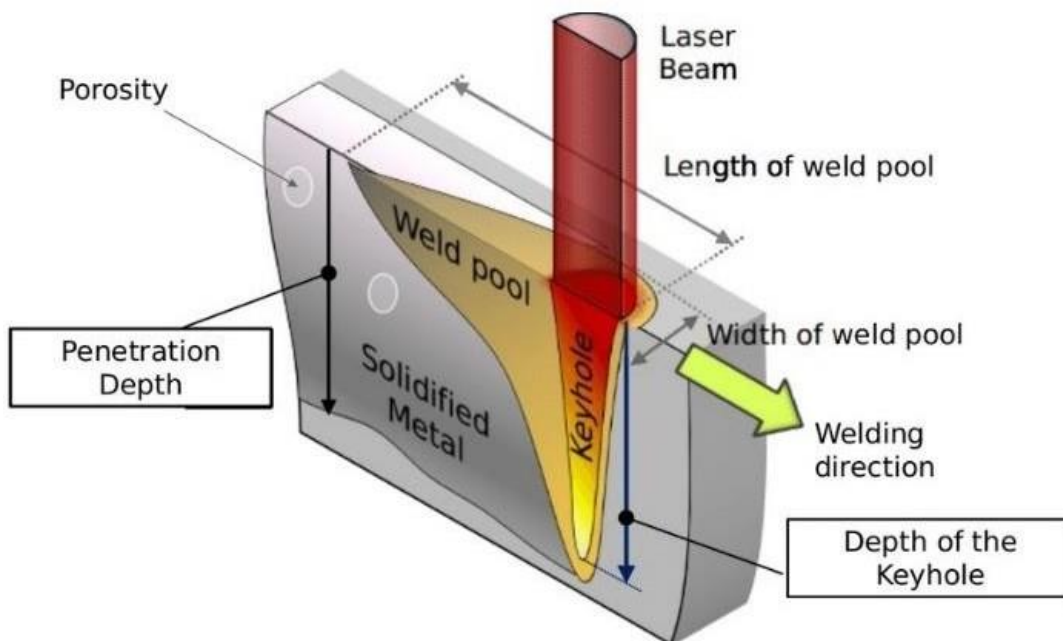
Laser Welding Phenomenon (Source: alliedscientificpro.com)
